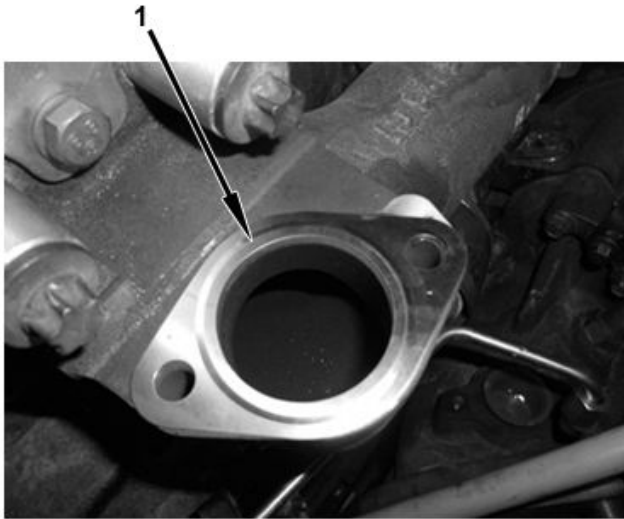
Rear Exhaust Manifold Outlet Gasket.
